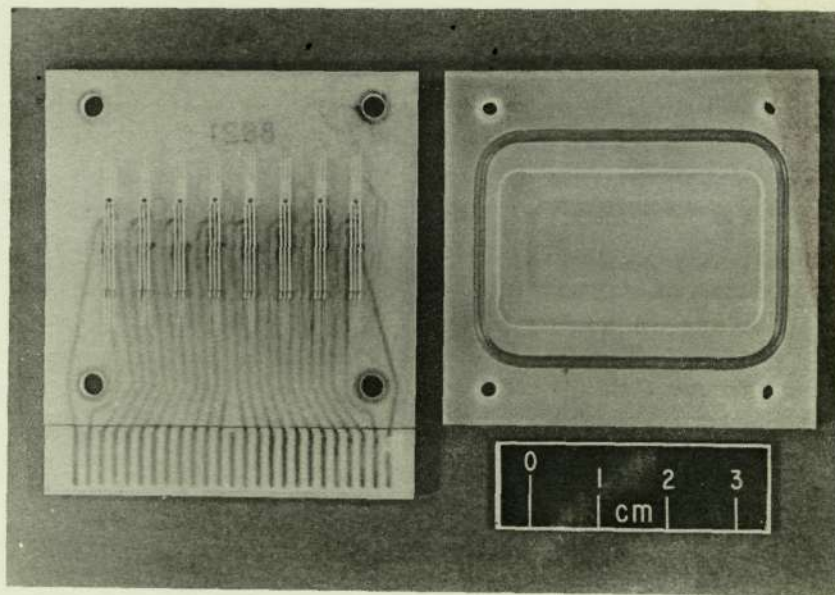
Spring-loaded test board for handling, shipping, storing, and testing chip devices.
